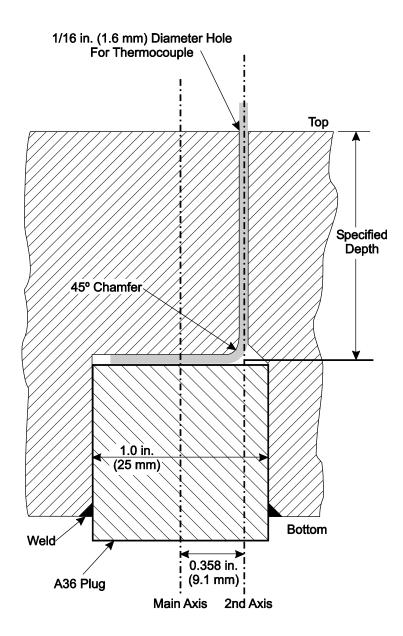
Detail of Embedded Thermocouple for Spray Cooling Test
